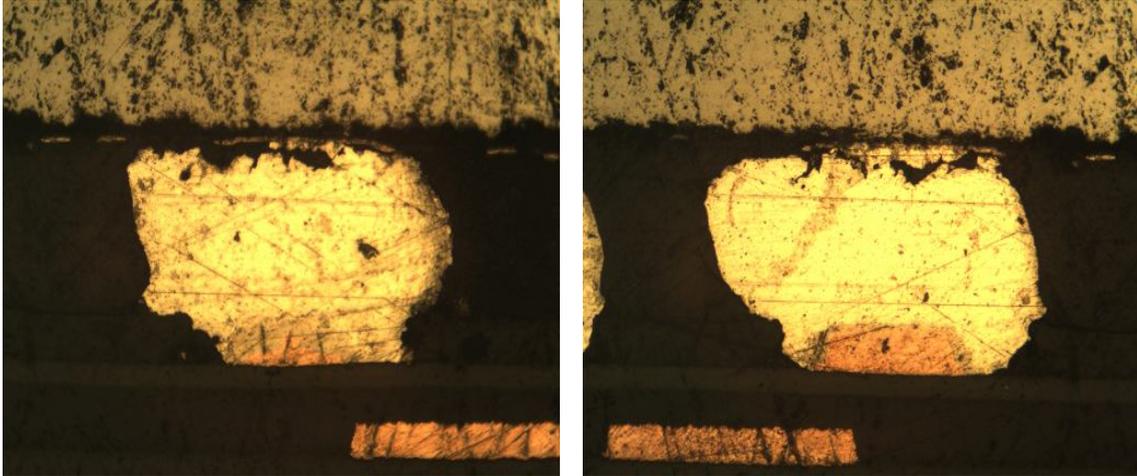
Hot Melt 1 CSP Solder Ball Failures, 1200 Cycles
